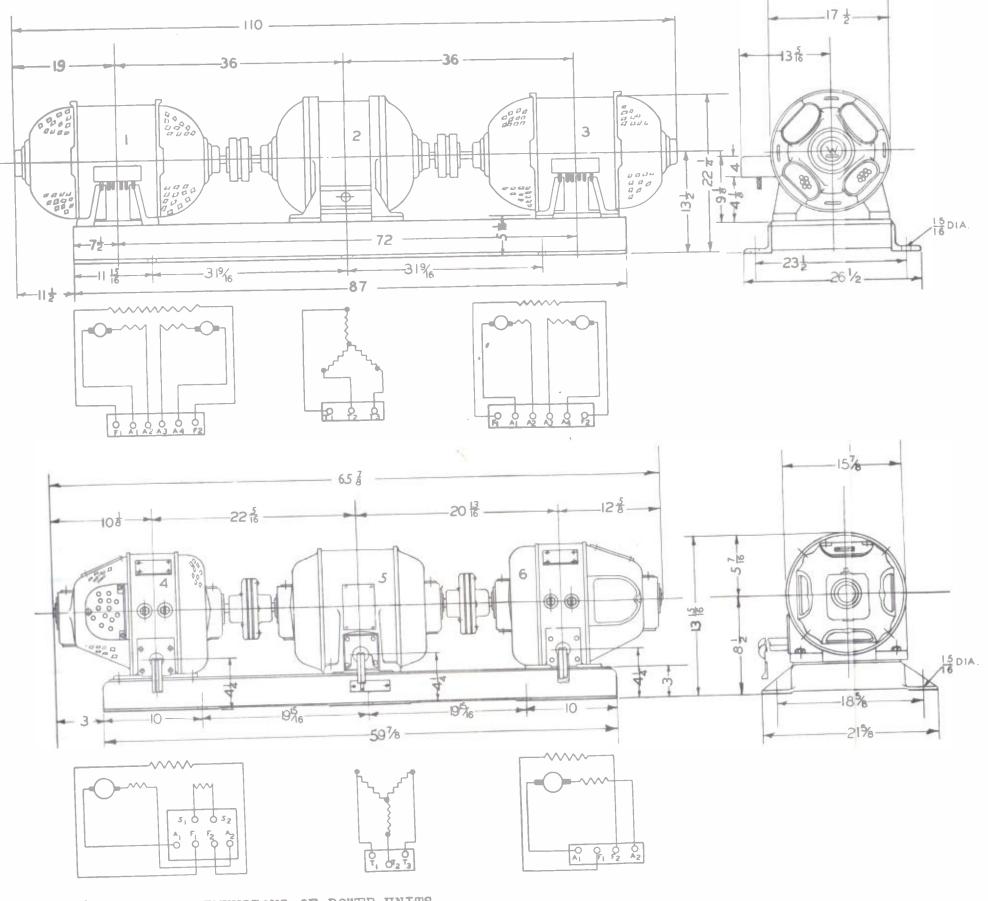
OUTLINE DIMENSIONS OF POWER UNITS DWG. P-7703750
